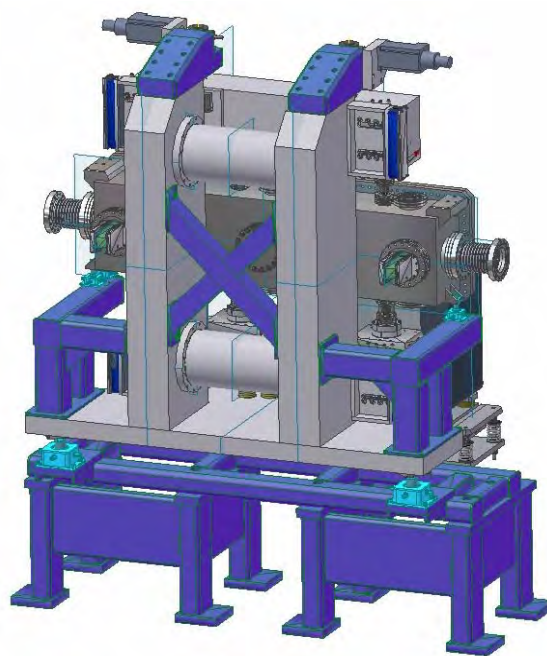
Reinforced chamber support at back of the CPMU assembly.
